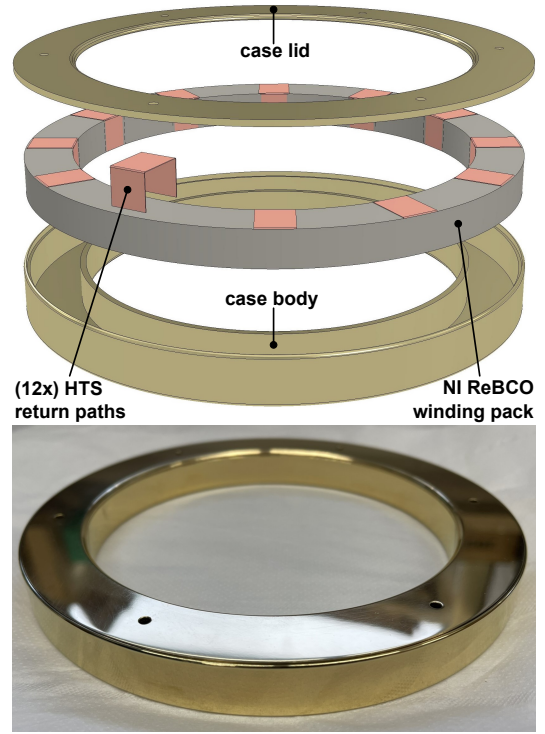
(top) Exploded schematic of the F-coil. The NI ReBCO HTS winding pack is a single-pancake coil of 150 turns closed by twelve radial bands connected in parallel. The fully soldered winding pack is soldered into a gold-plated copper case. (bottom) A photograph of the manufactured F-coil.
